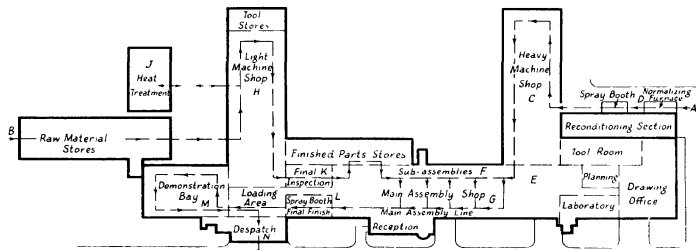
LIGHT AND MEDIUM MACHINE TOOLS
